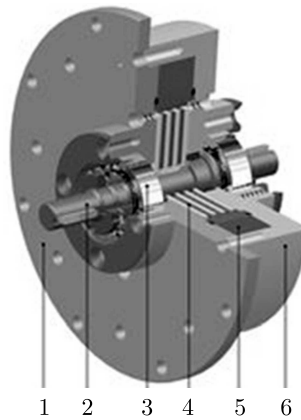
Structure of the damper: 1 – cover, 2 – shaft, 3 – bearing, 4 – plates, 5 – control coil, 6 – housing
